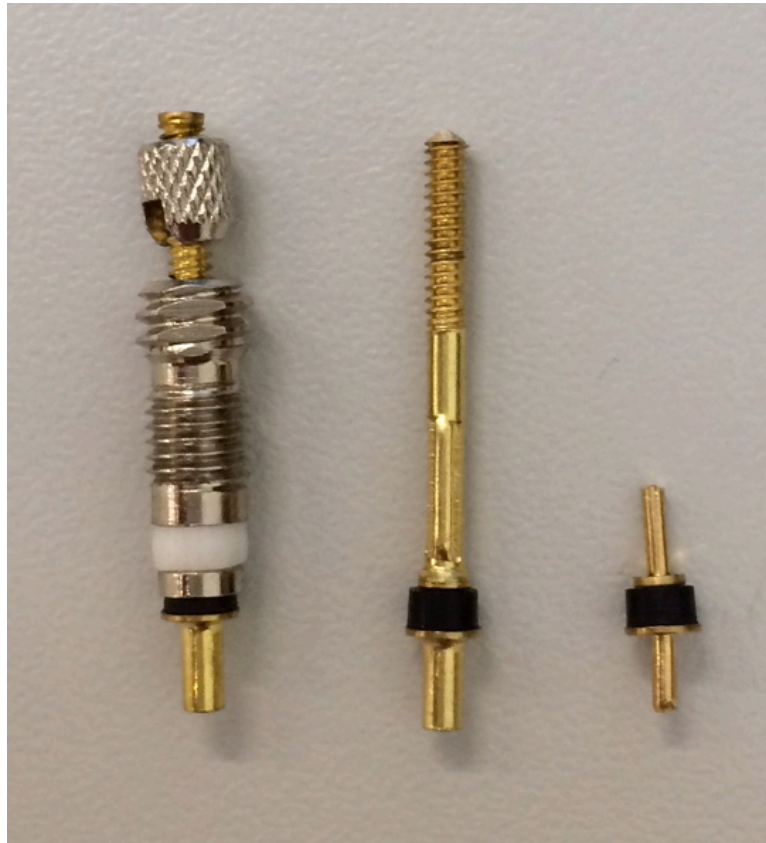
On the picture are represented the Presta valve type assembled, left. On the center the unmodified sealing element of the valve and on the right the modified sealing element use for the compressor head.
